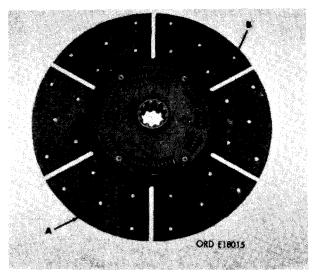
INSPECTING DRIVEN PLATE FOR DAMAGE .
